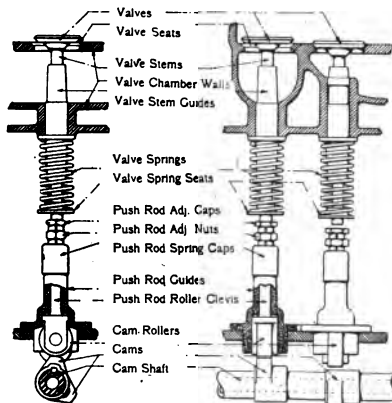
FOUR CYLINDER VALVE PARTS.
